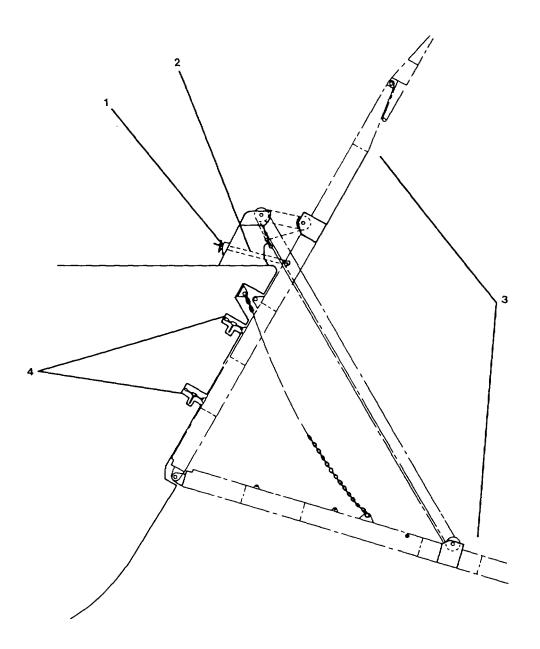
Bow Ramp Locking Devices (Sheet 1 of 2).
